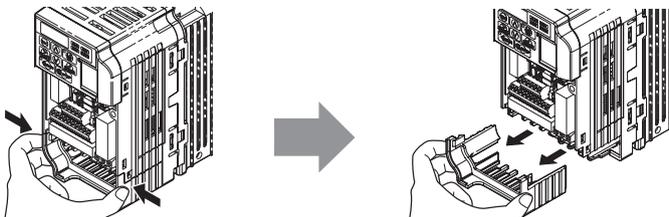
Remove the Terminal Cover on an IP20/Open-Chassis Drive
